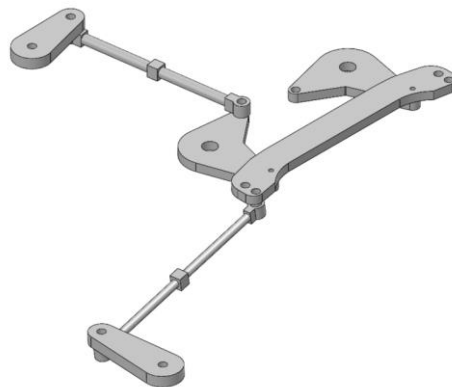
Steering system 3D CAD, isometric view.
